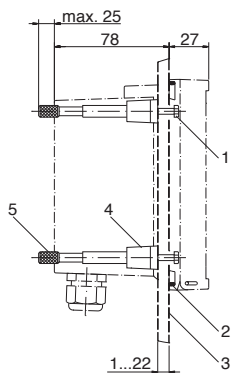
protective hood for wall and pipe mounting
